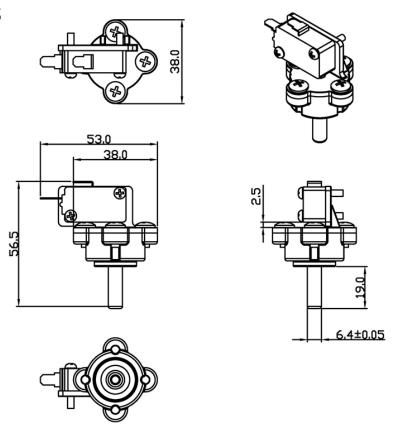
Water pressure switch (AWPS-1/4) (Development plan)
